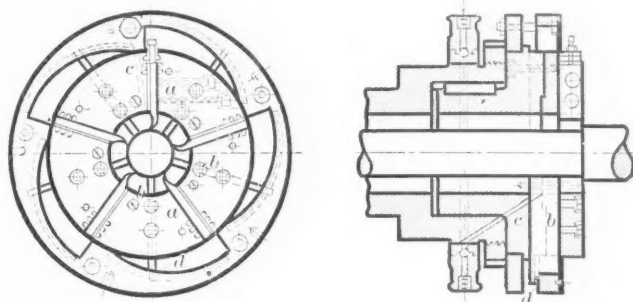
Hollow Mill used in Machine shown in Fig. 1.
